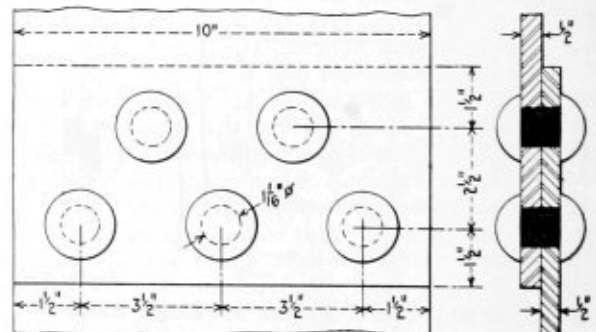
(b).—Double Riveted Lap Joint, Staggered Riveting
